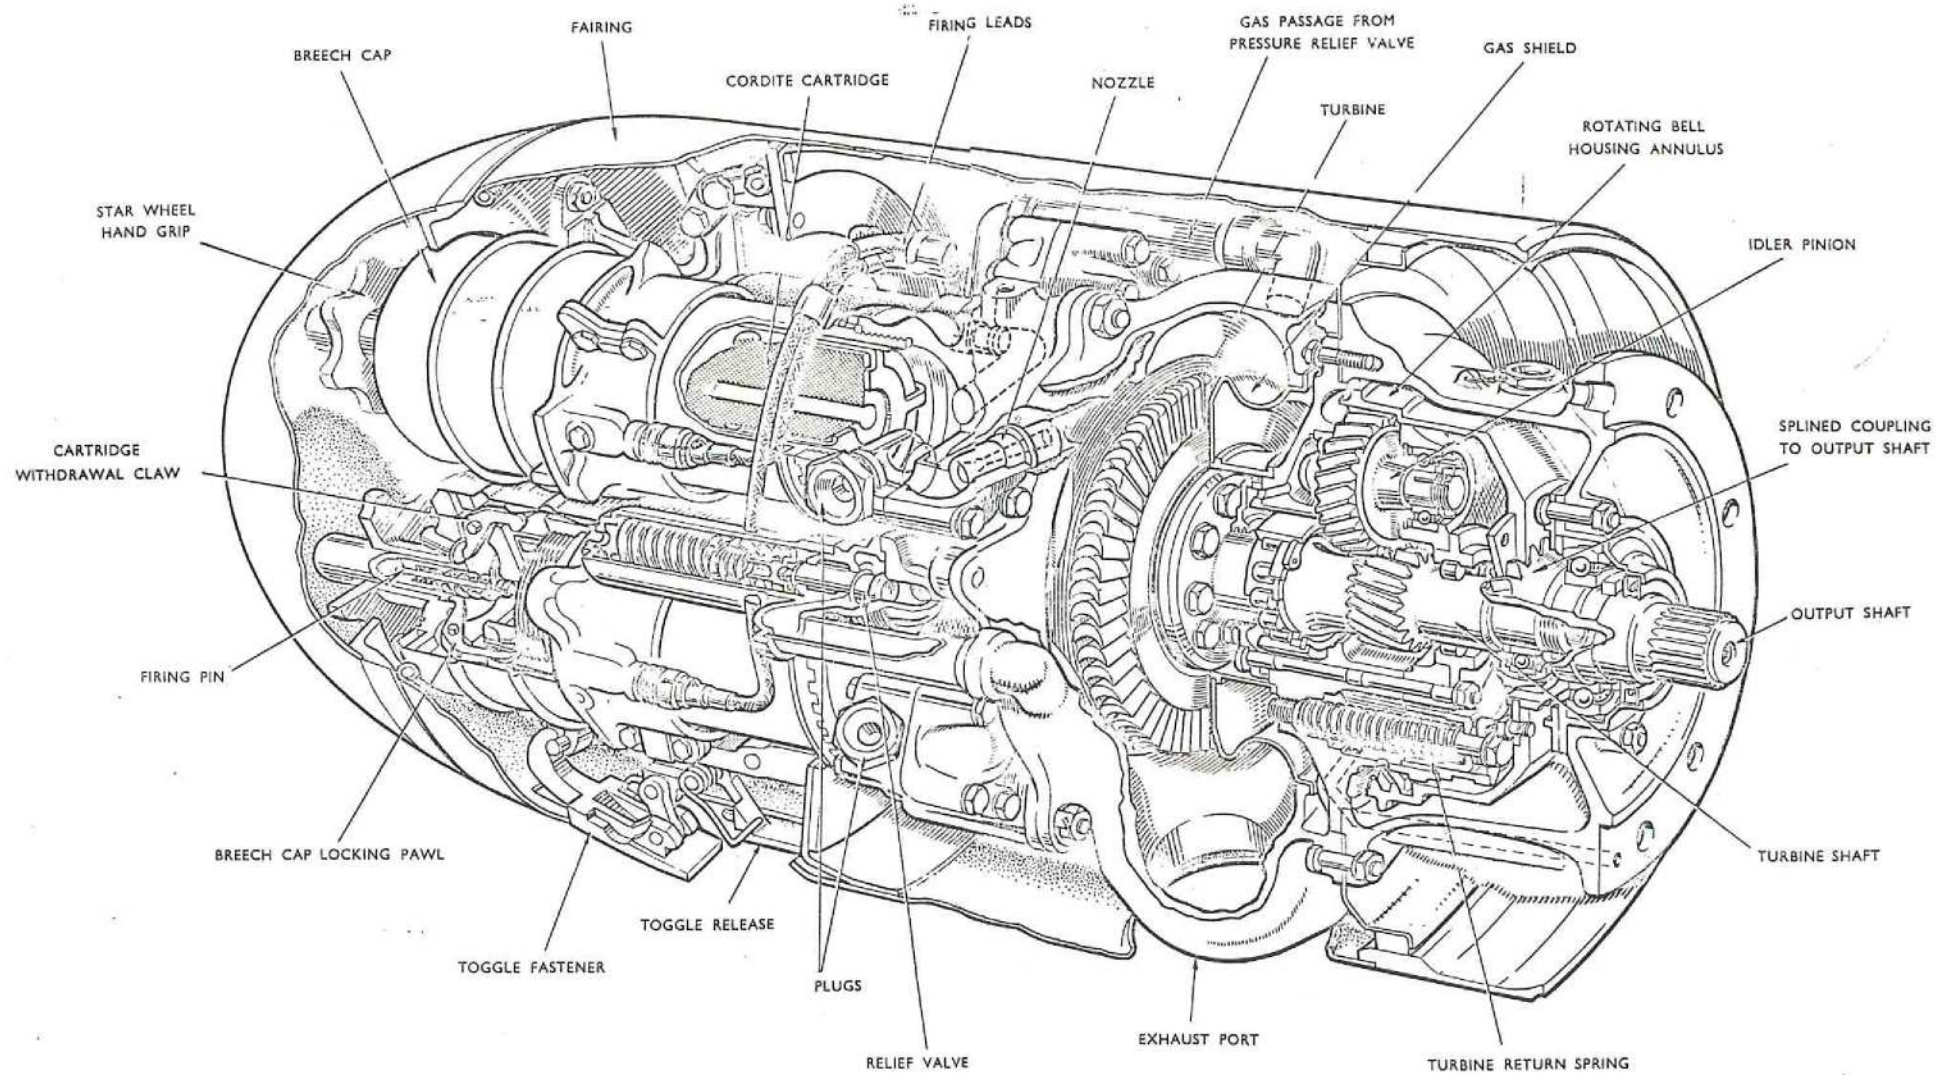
Sectional perspective view of TB S-720 Mk.2 turbo-starter
